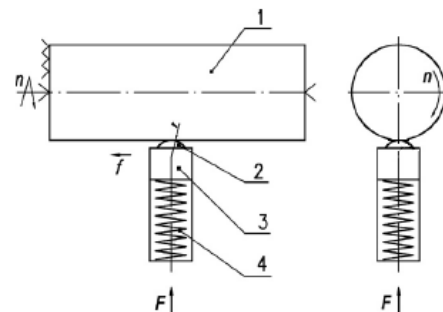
Slide diamond burnishing: 1 - object burnished, 2 - burnishing tool, 3 - tool holder, 4 - pressure control spring, n - rotational speed, f - feed, F - burnishing force.
